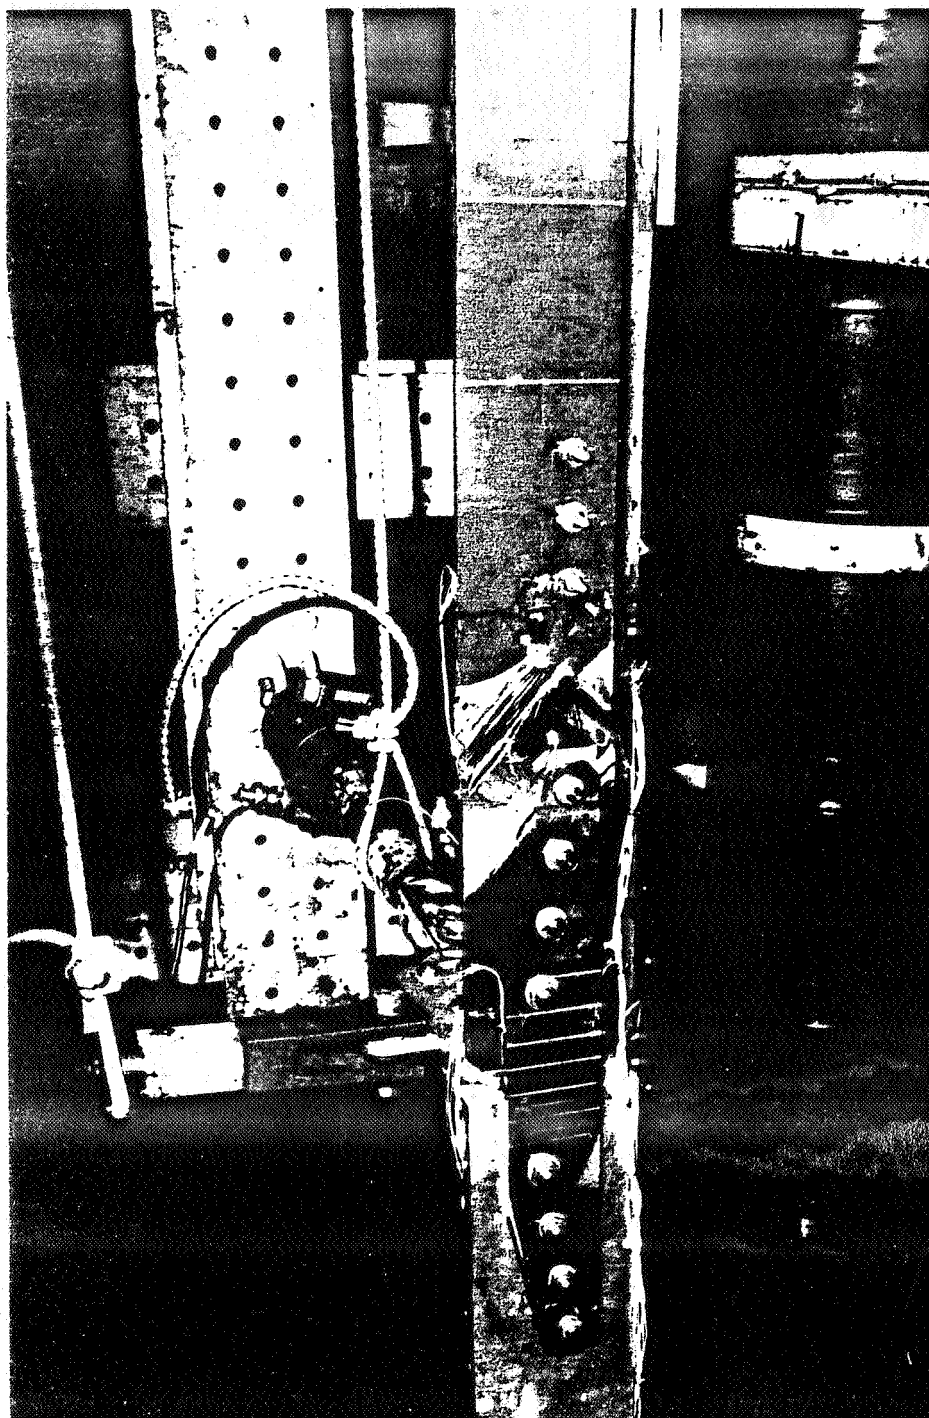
TECHNOLOGY DEMONSTRATION - TEST SECTION FAILURE
